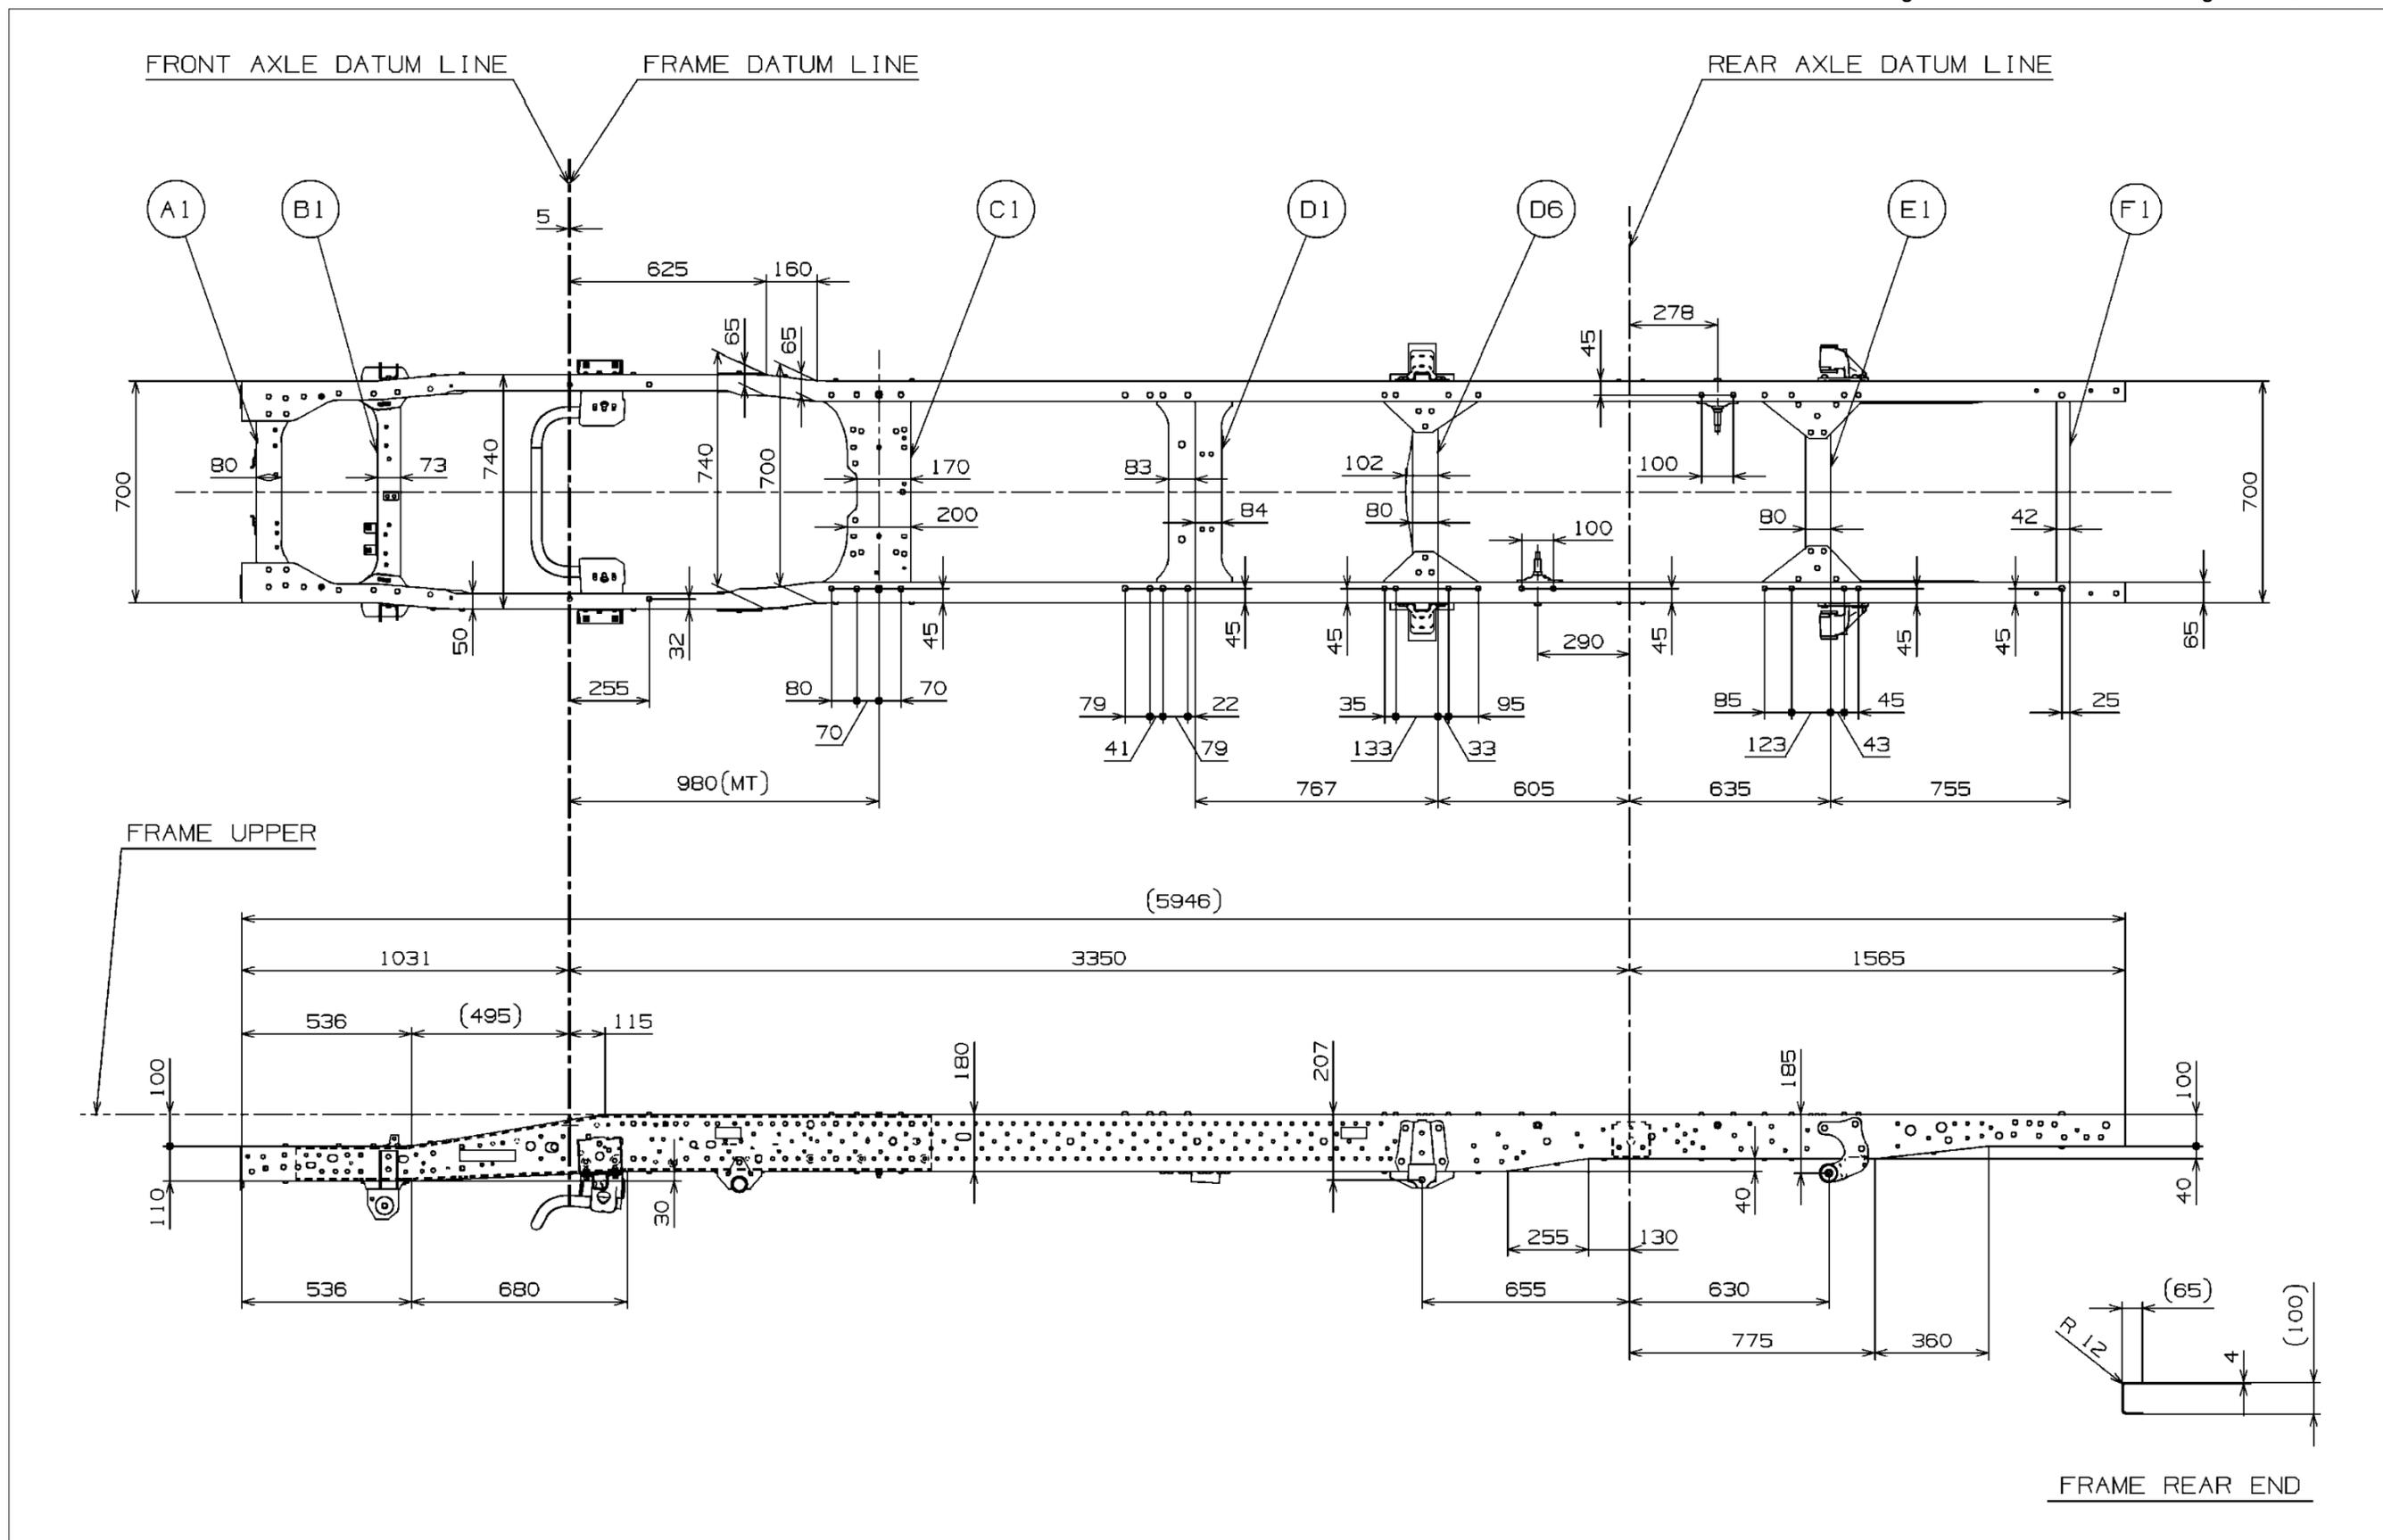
Chassis Frame Drawing NNR85L/U-HD5AYE
